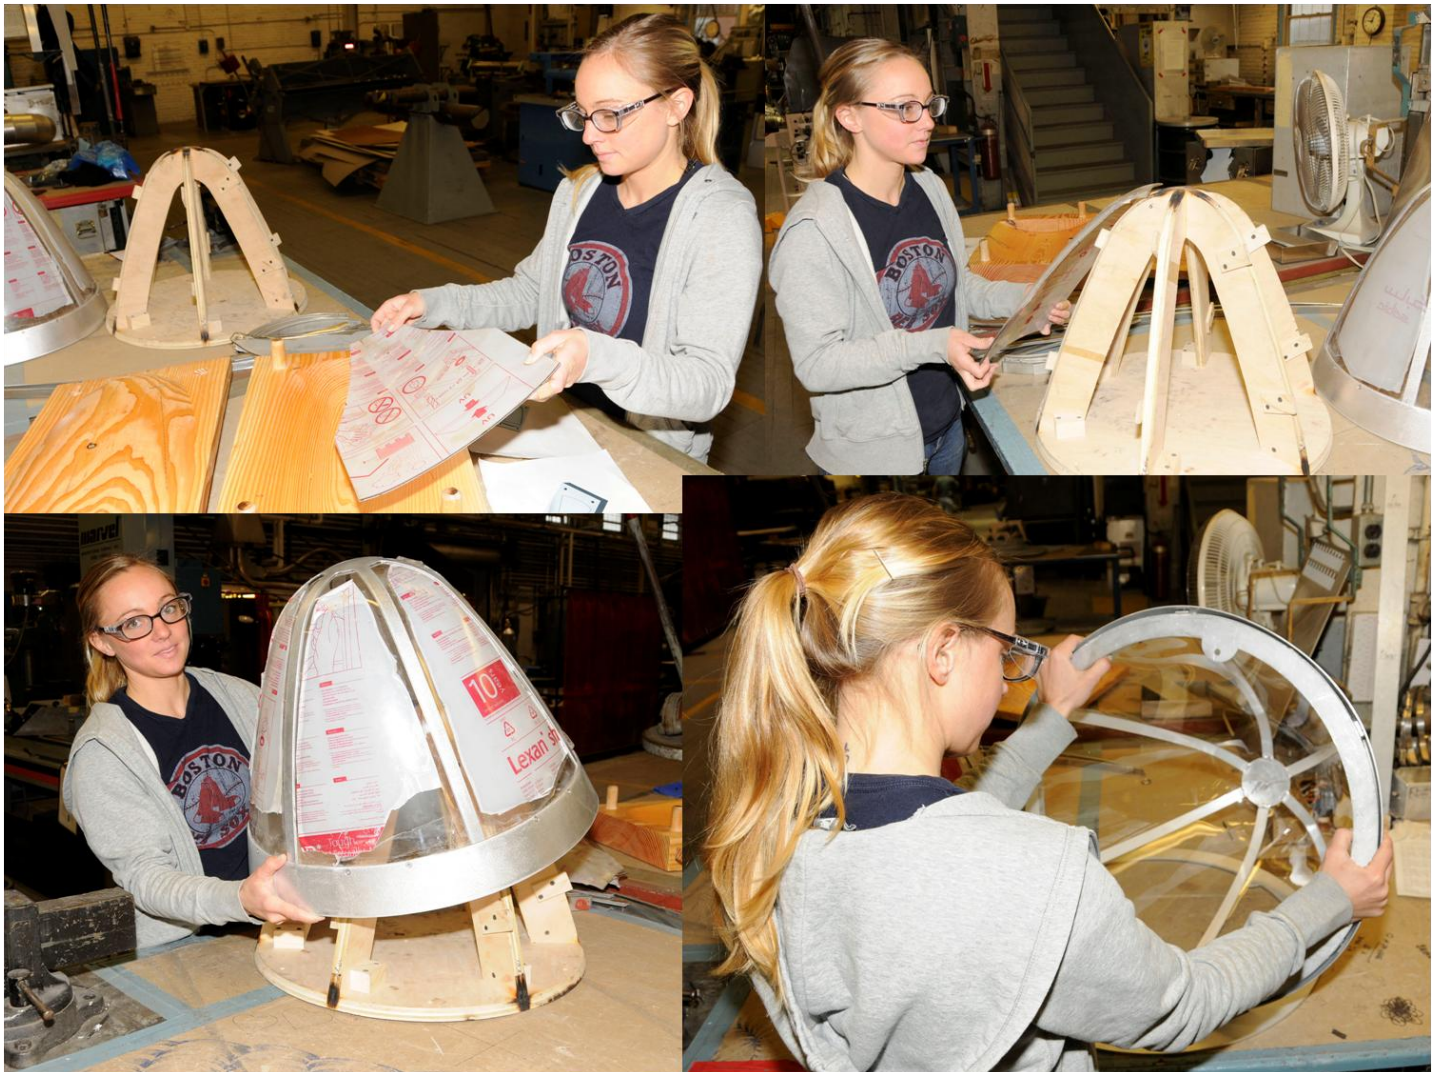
Mold Designer Demonstrates Bow Dome Viewing Pane Mold
